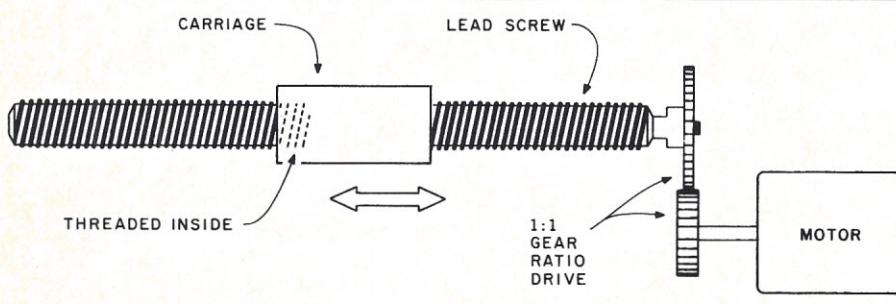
Lead screw fundamentals. Carriage rides revolving screw threads.
